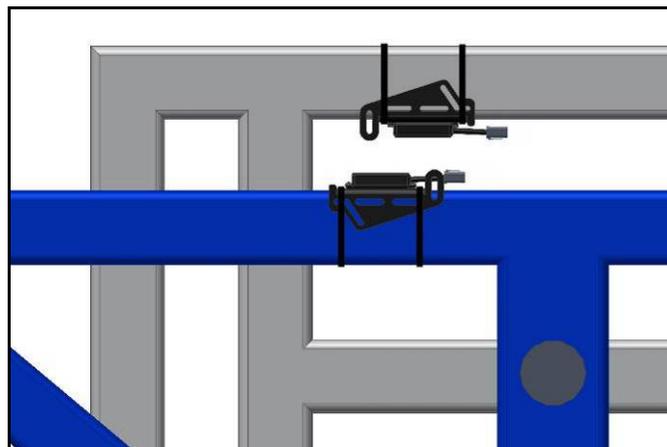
Inverted Chassis Roll Sensor Mounting on a Center Pivot Suspended Boom
